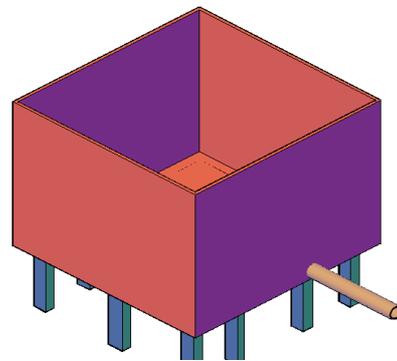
Assembly drawing of the new seed cane fungicide tanker.
